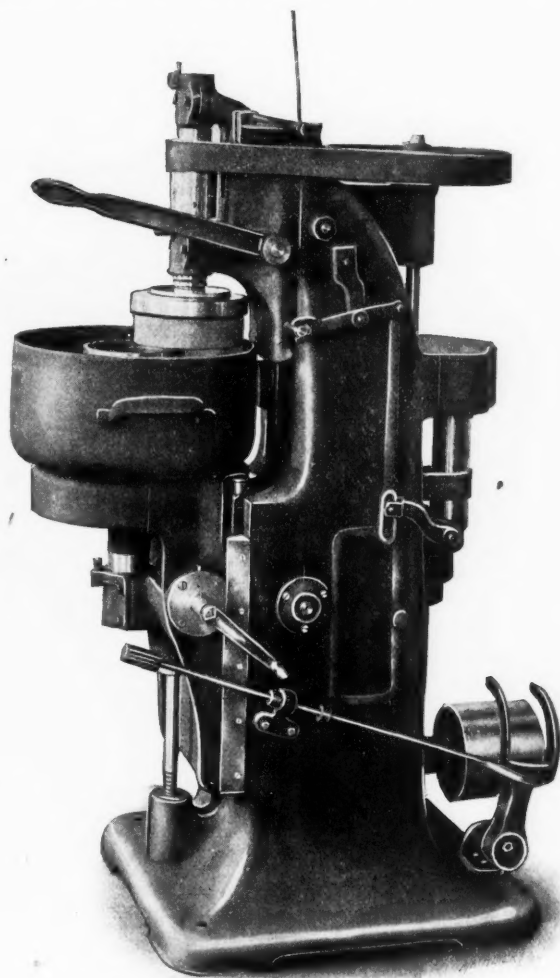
A Rotary Surface Grinder, provided with Magnetic Chuck
